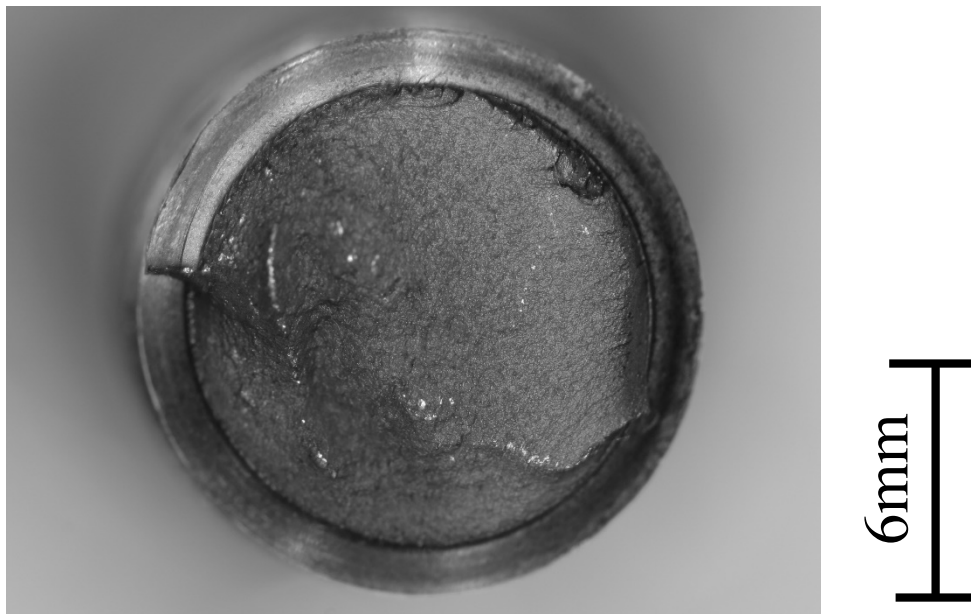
Fractured DTB-I in tensile fatigue tests
